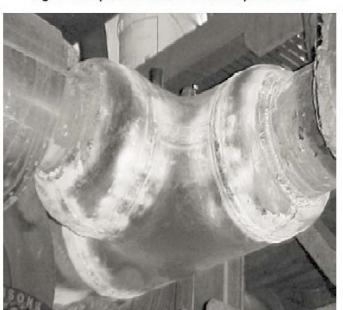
Example of a Welded Leak Box Repair of a Tee
